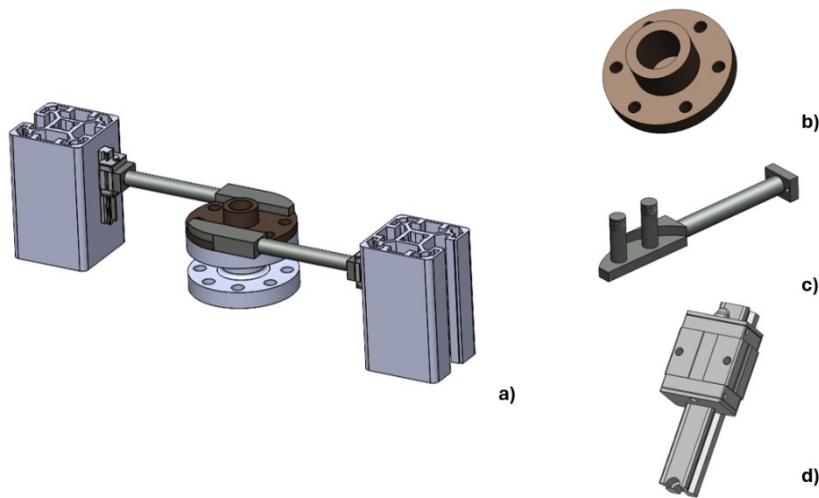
Torque meter anchoring system: (a) complete assembly view, (b) steel adapter, (c) support branches, and (d) linear guide.
